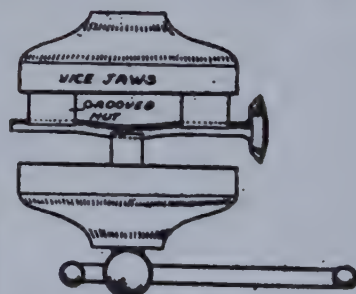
Method of straightening a bent shaft or rod such as a valve stem. The vise is used as a lever. The supports are grooved and adjusted to suit the bend.
